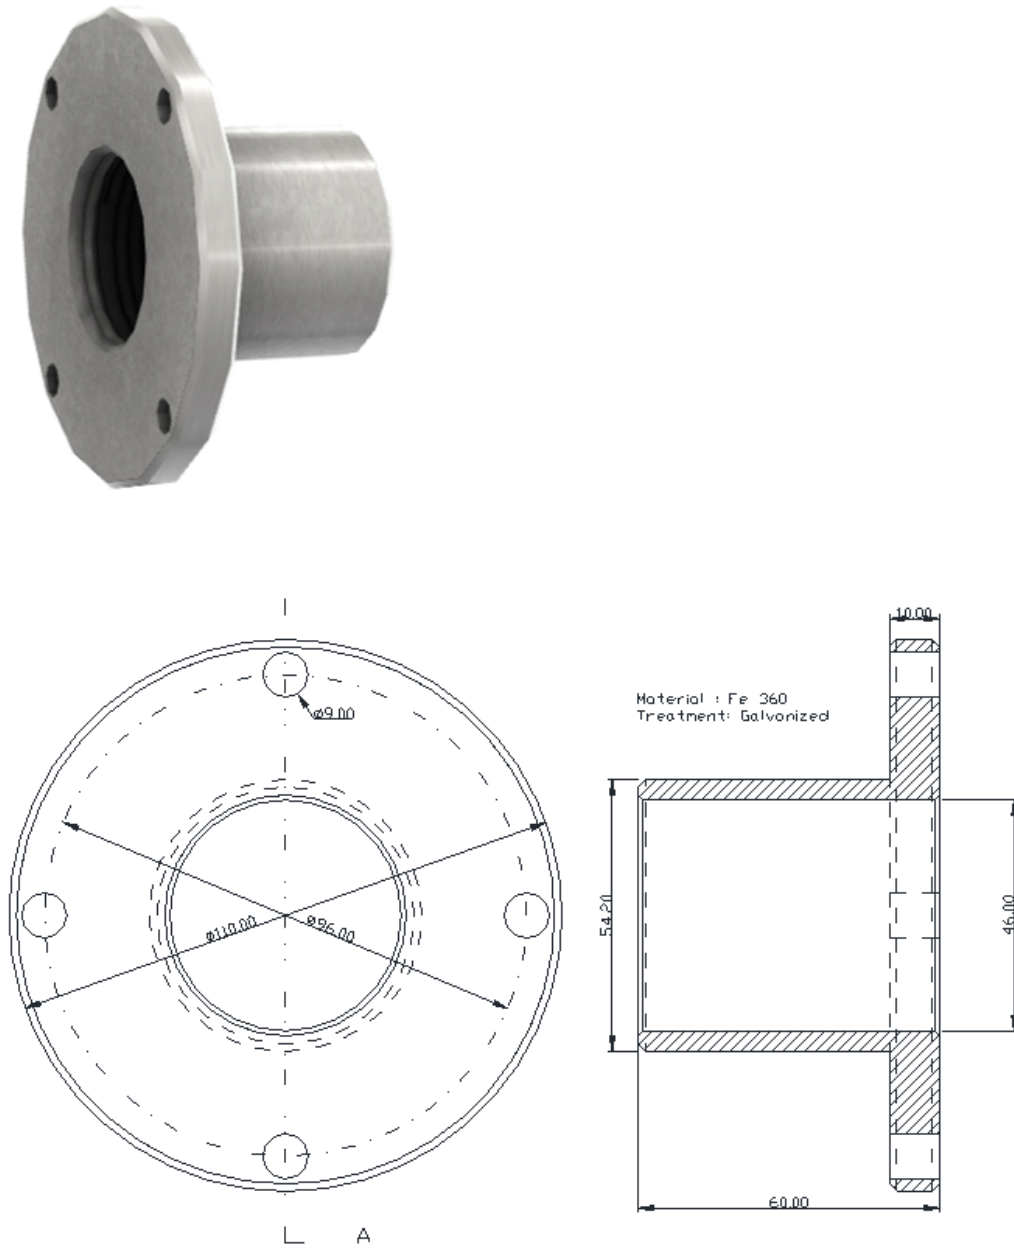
Boiler Mounting Counter Flange for FOC Installation
